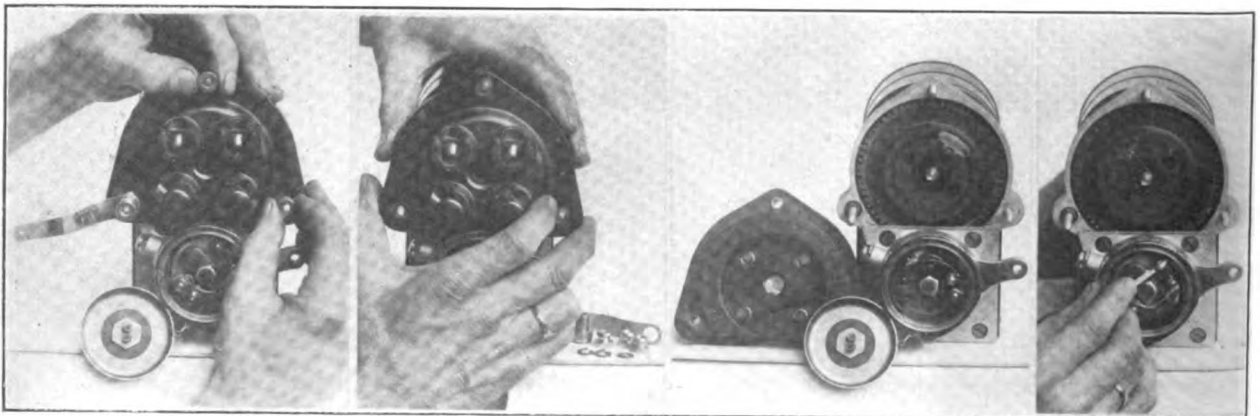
Unscrew, Displace Knurled Nuts, Washers and Spring Holding Interrupter Cover or Cap.
